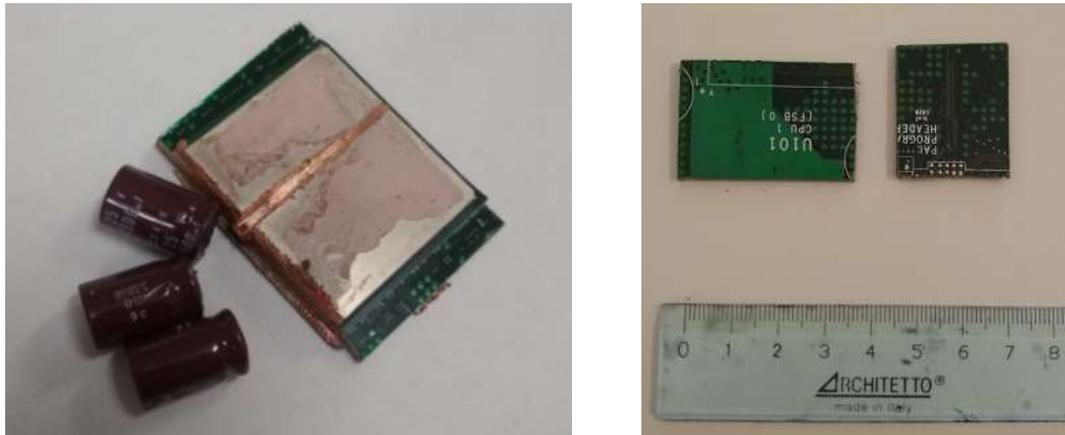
Removed parts from the PCB (left) and PCB pieces after cutting (right)
